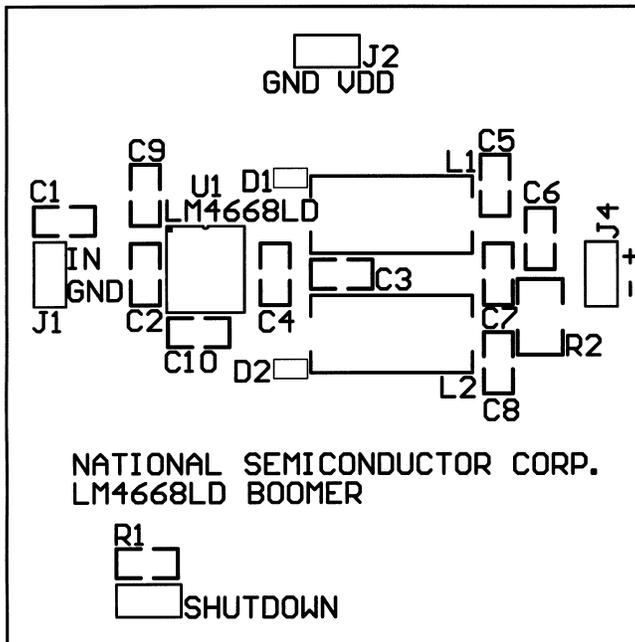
Recommended NHH0014A PCB Layout Top Silkscreen Layer
